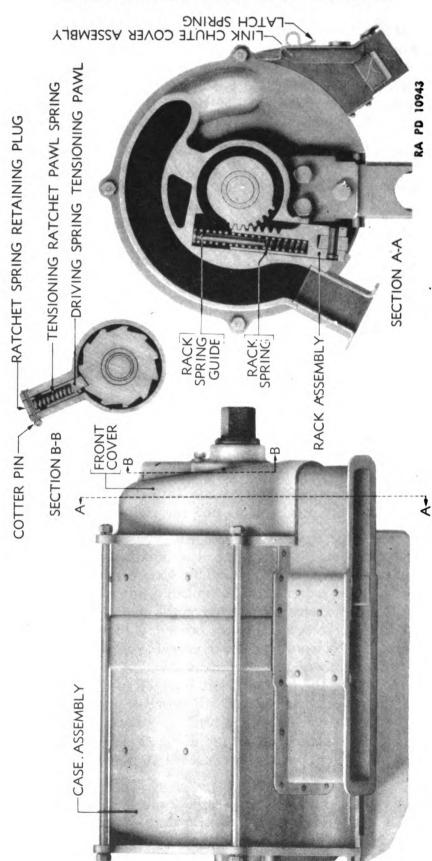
20-MM Feed Mechanism AN-M1 – Front Cover Sectional Views
